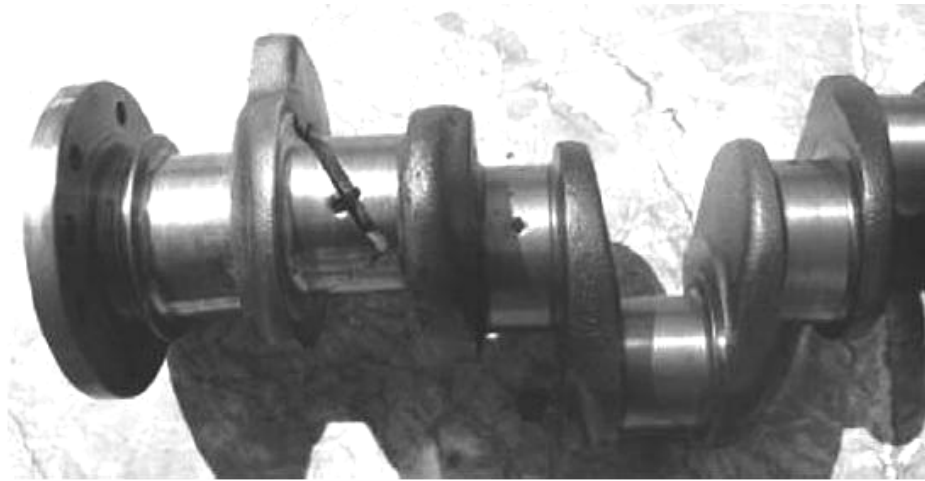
Close up of crack in failed crankshaft from the study by Asi [2006].
